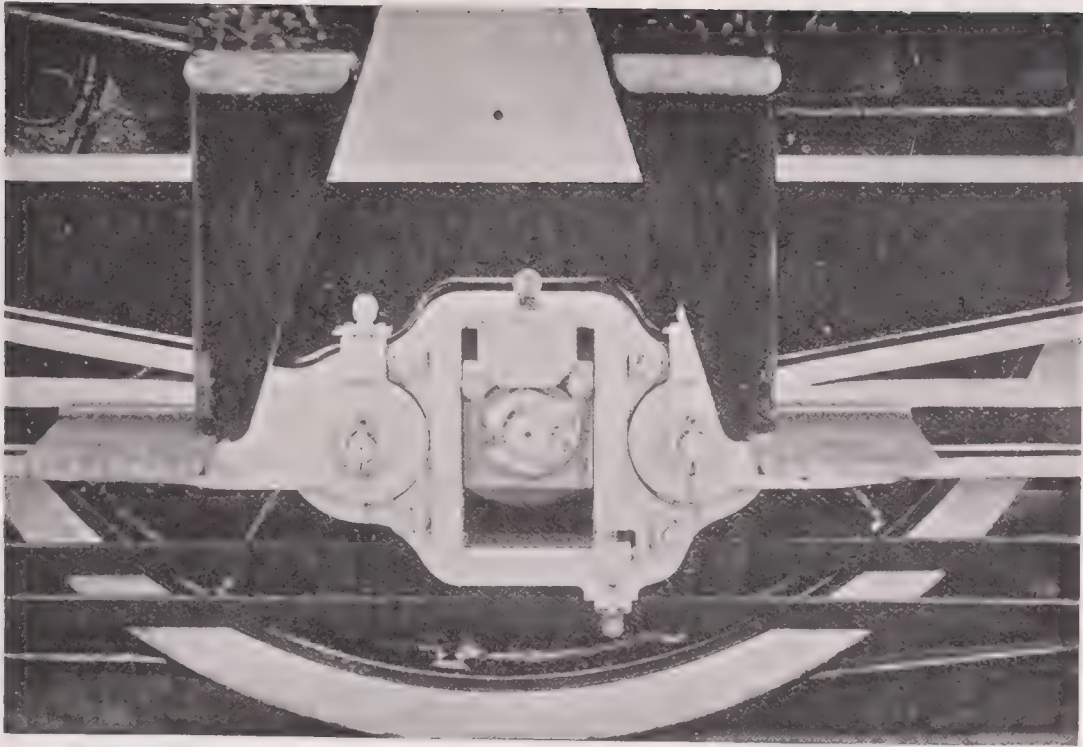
COMMUNICATING BEARING BETWEEN CRANK AND CONNECTING ROD ON
